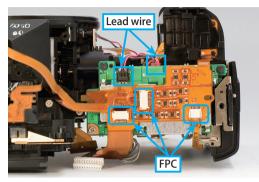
Position of DC/DC PCB Ass'y FPCs and Lead Wires
